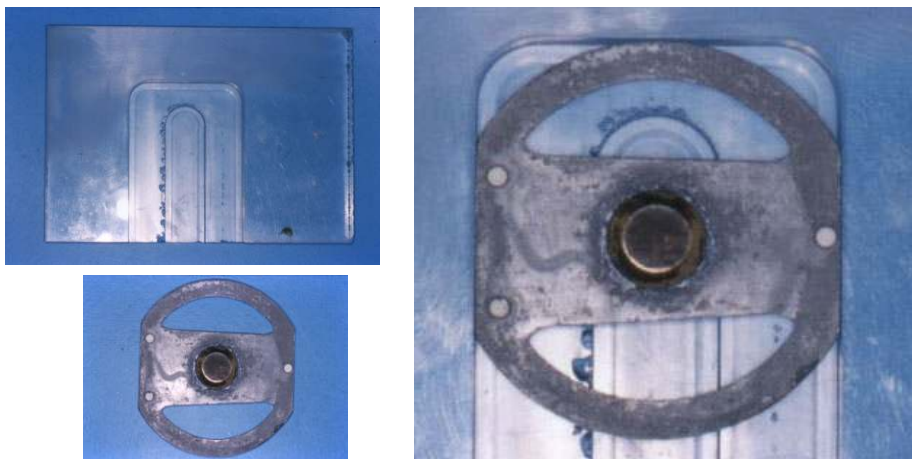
Mounting plate with both end cut and acrylic platform.5
